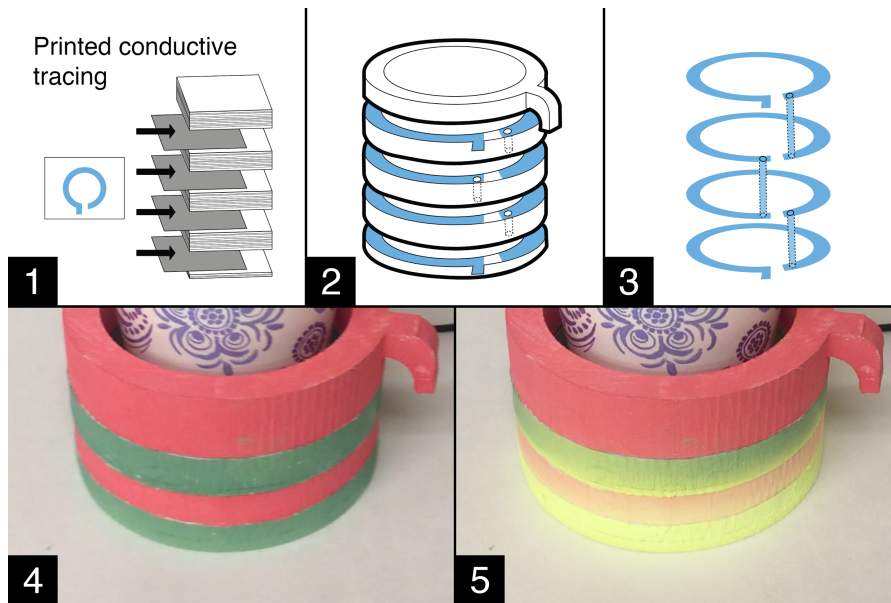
Fabricating a cup holder: (1) combining four functional layers of printed coils with a stack of paper; (2) sculpting five parts of the cup; (3) connecting the coils by injecting conductive epoxy into the cross-layer channels; (4) the applied thermochromic color without heat; (5) color changes when the power is connected by heat generation.
